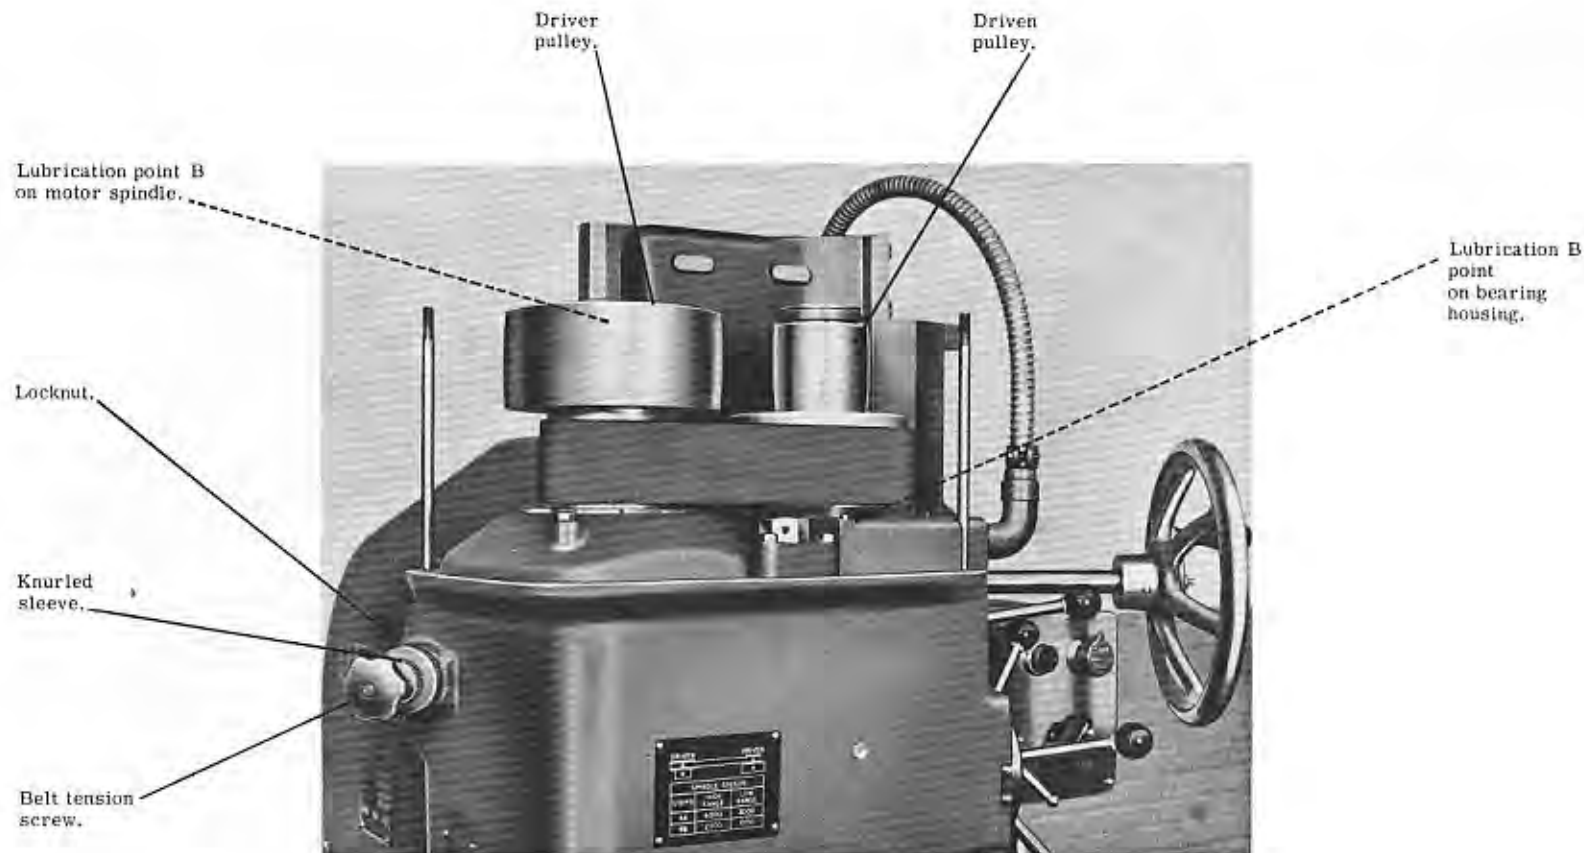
VIEW OF HEAD ON L. H. 3. MACHINE WITH TOP COWL REMOVED.
